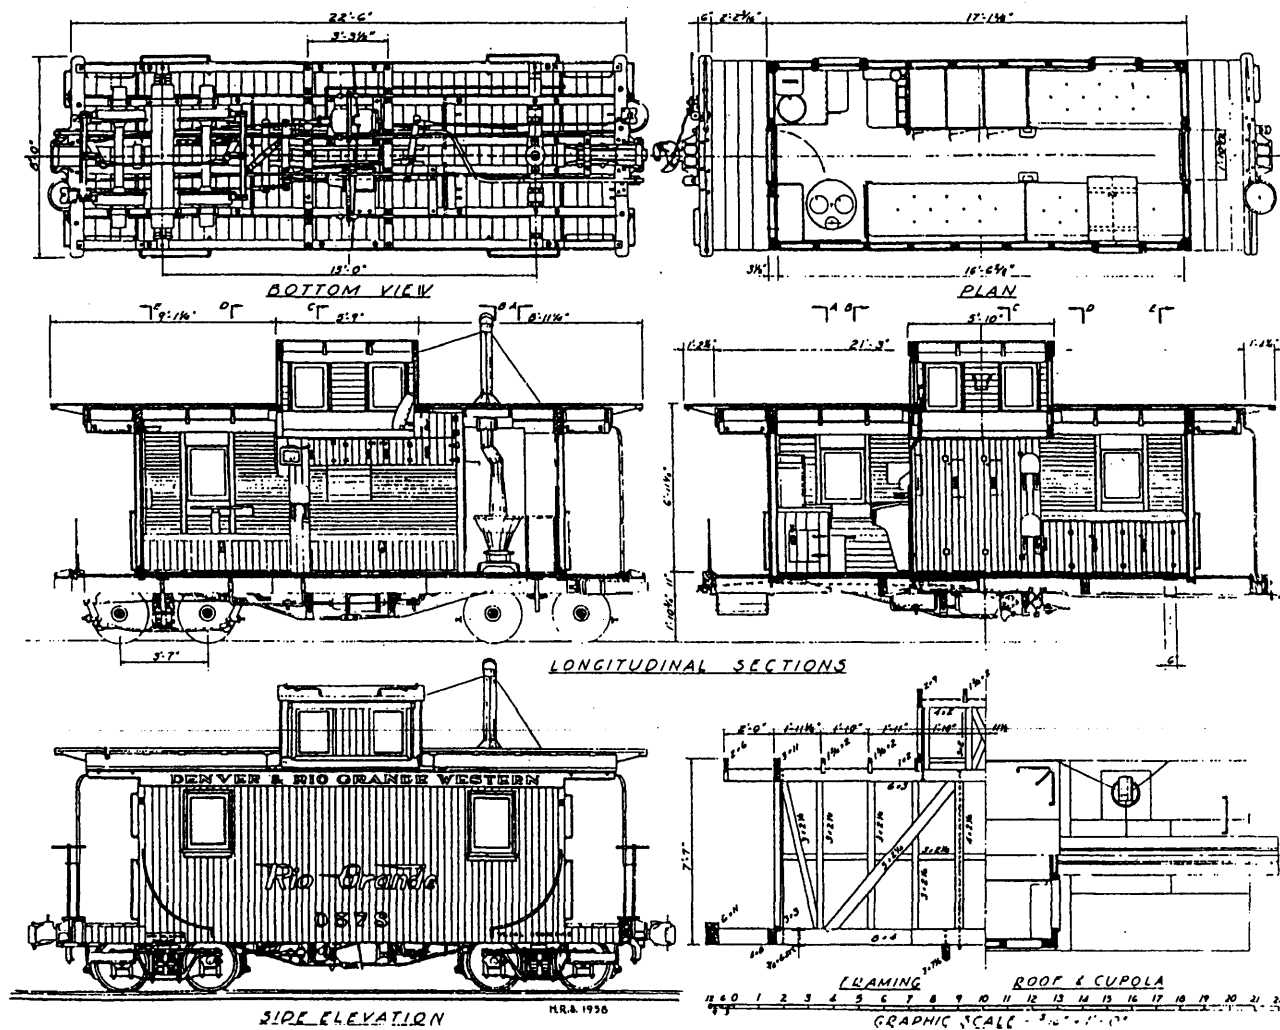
Elevations and Plans for D&RGW Caboose No. 0578
